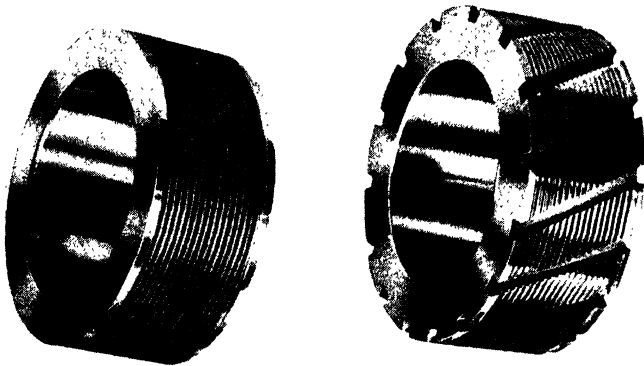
GROOVED AND PLAIN CRUSHING ROLLERS
